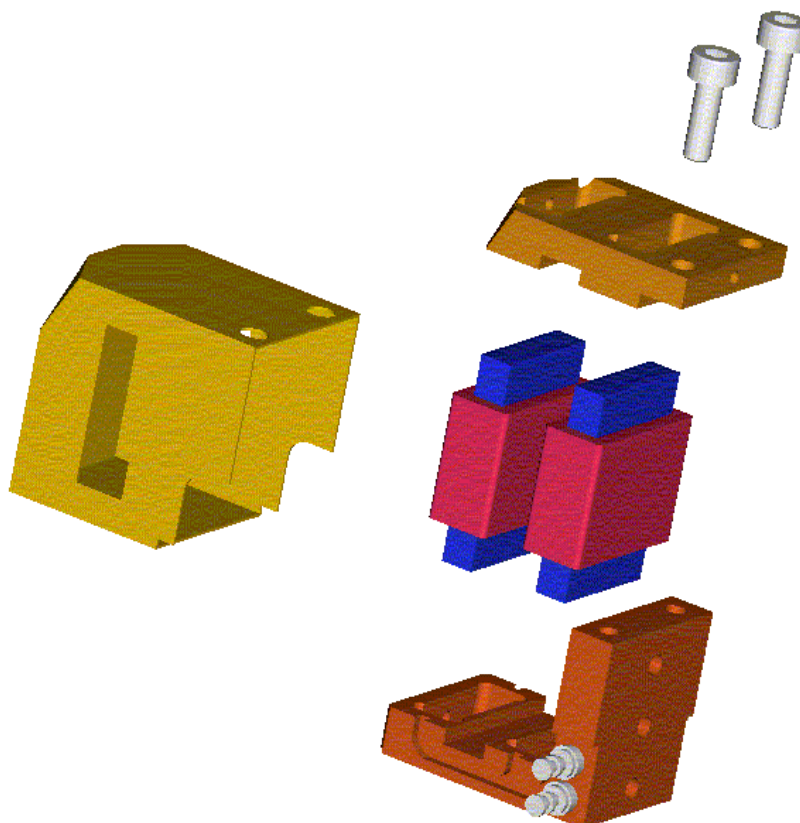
Assembly of a shielded motor assembly (SPIRE-BSM-020-005) with heat shielding
